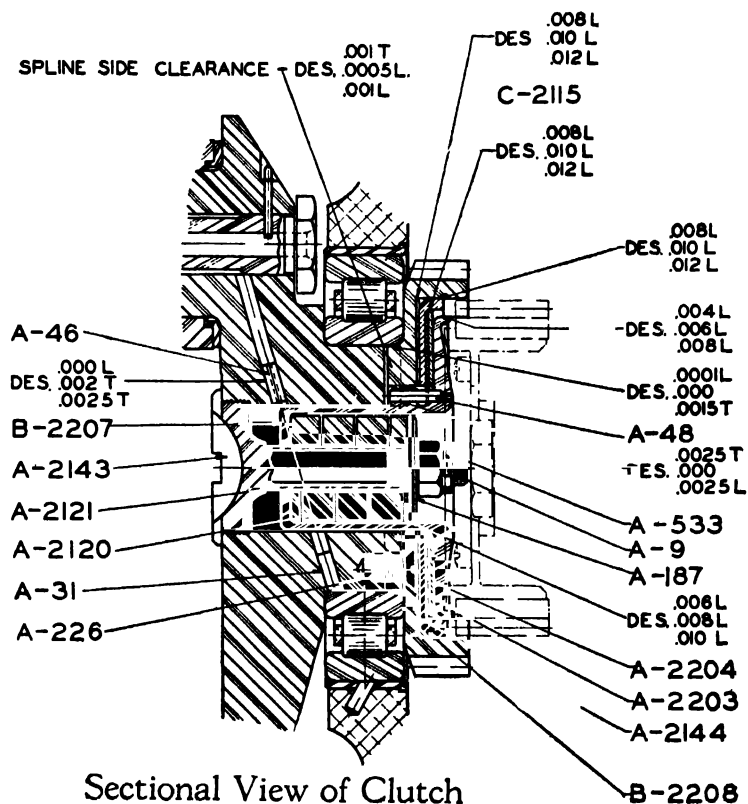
Assembly Drawing of "Wasp" Supercharger Drive Clutch.
